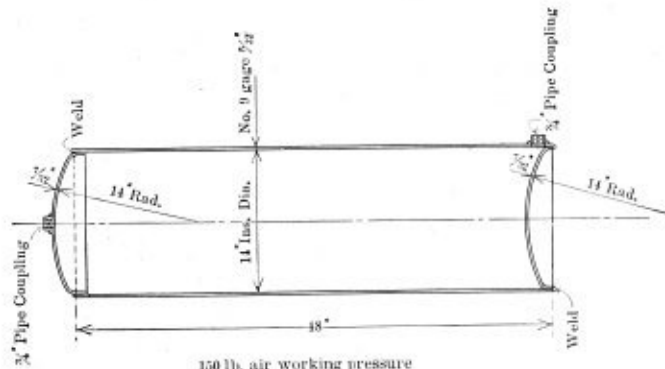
Sketch of Tanks Used for Welding Tests
